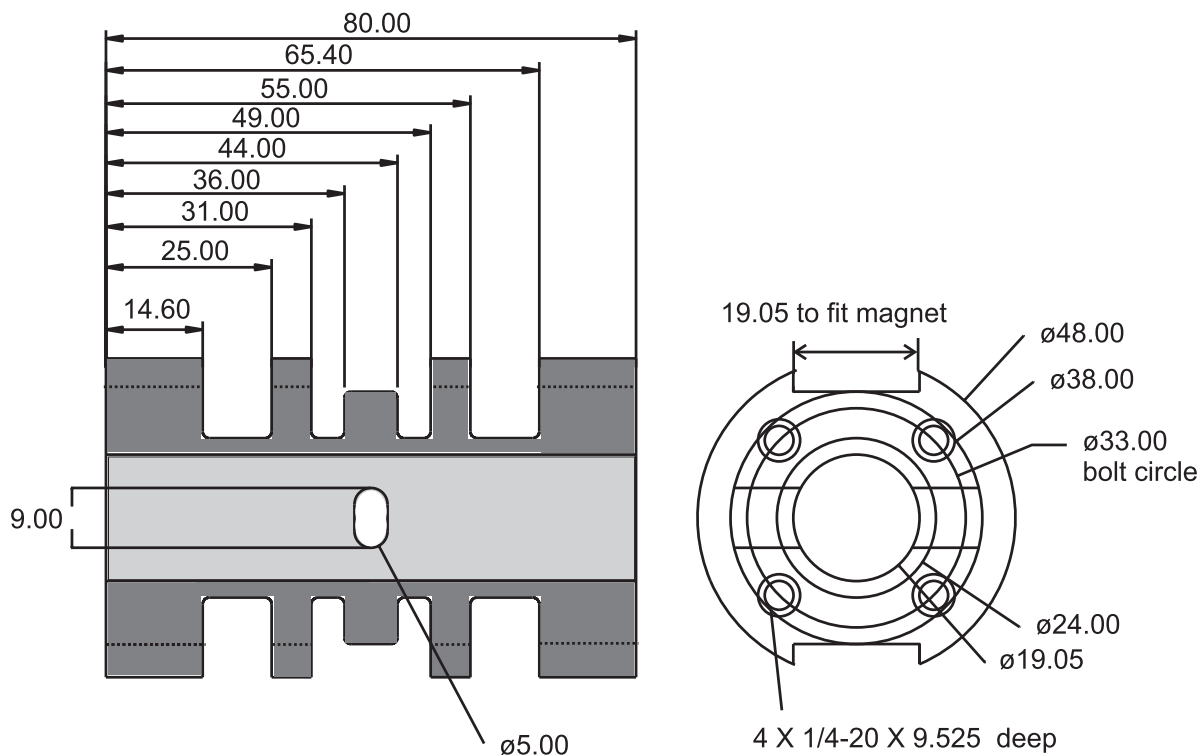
Machine drawing of the Boron-nitride hybrid IP-trap form (all units in mm).
